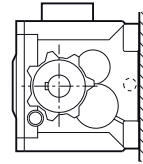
Mounting positions for helical gearbox D/Z foot-mounted design, sizes 19 - 29
